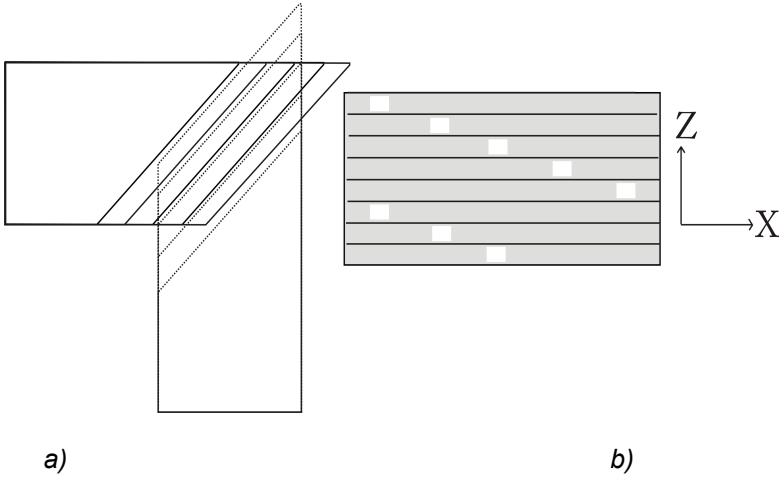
Overlap design in joint region for a multiple lap assembly a) top view b) side view and the coordinate system
